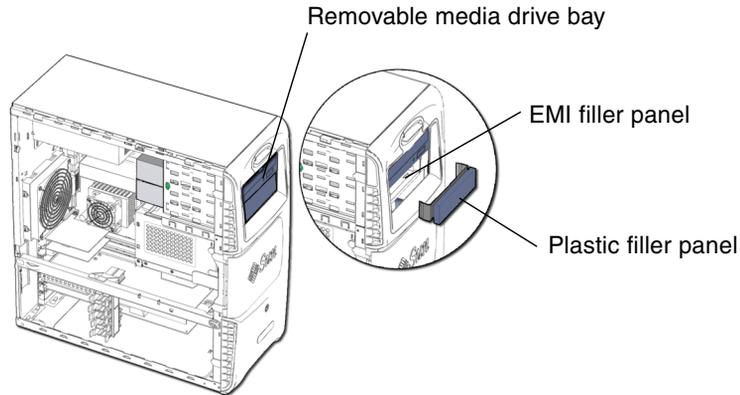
Removable Media Drive Bay and EMI Filler Panel
